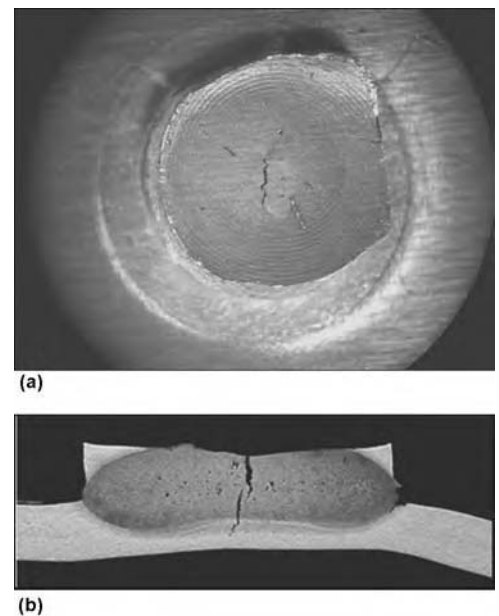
Views of an AA6111 weld. (a) Top view of a peeled weld button. (b) Cross section of the same weld
